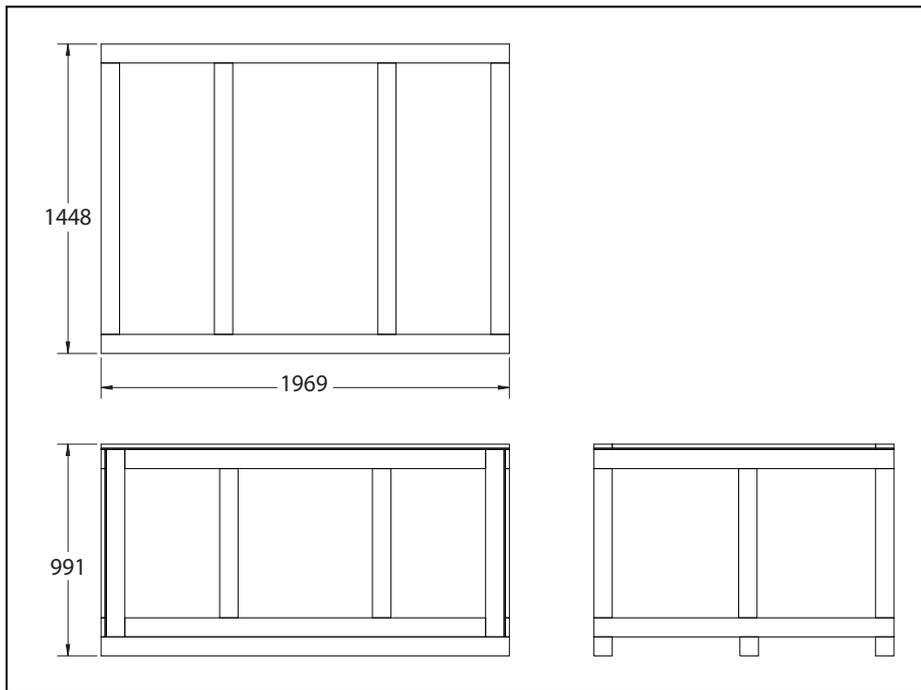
HD-1500 Shipping Crate Outer Dimensions
